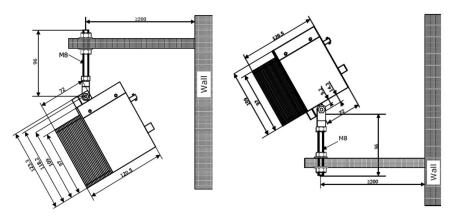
Mounting a camera to a wall or a ceiling (e.g. ARTTRACK2 camera)
